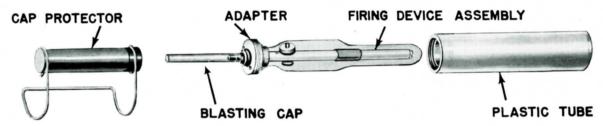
Exploded view of firing device assembly staked to the coupling base, cap protector, and plastic transportation tube.
